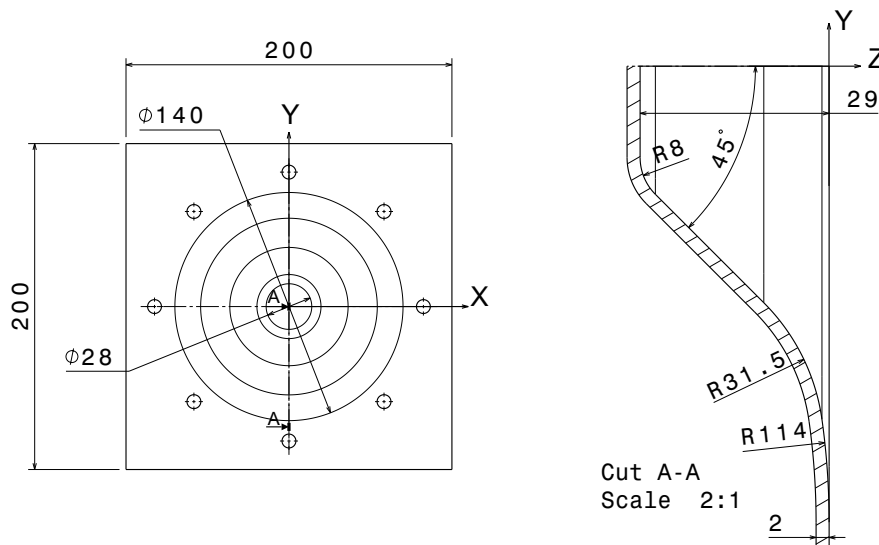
Geometry of formed cone (Dimensions in mm)
